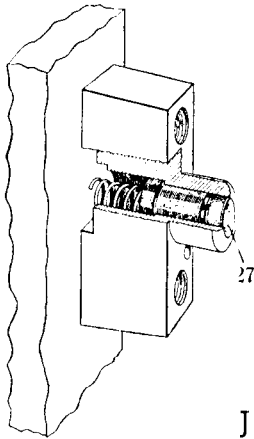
View of mold disk locking stud block, showing the self-oiling locking stud bushing. The spring plunger 27, has on it a felt wiper which lubricates the interior of the bushing and expels any type metal chips, each time the bushings are used for locating the mold disk.
